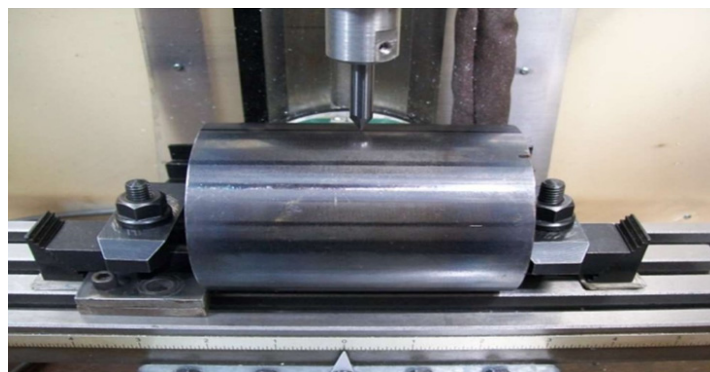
Generation of semi-elliptical shape defects on the pipe surface using the CNC machine.
